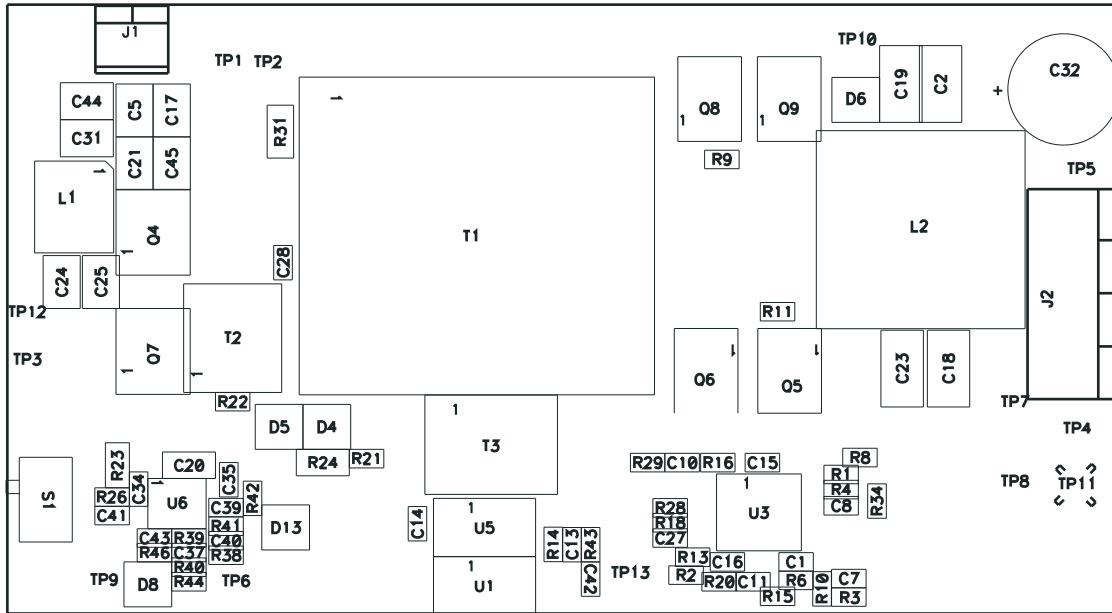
UCC25230EVM-662 Top Layer Assembly Drawing (top view)
